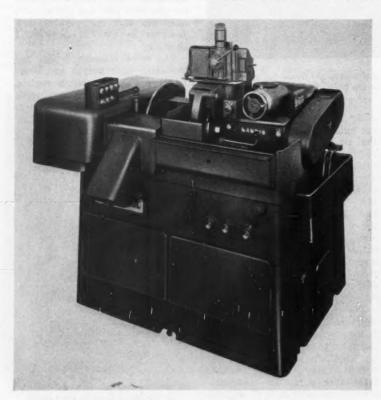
Turbo-jet blade hydraulic grinding machine built by Landis Tool Co.
